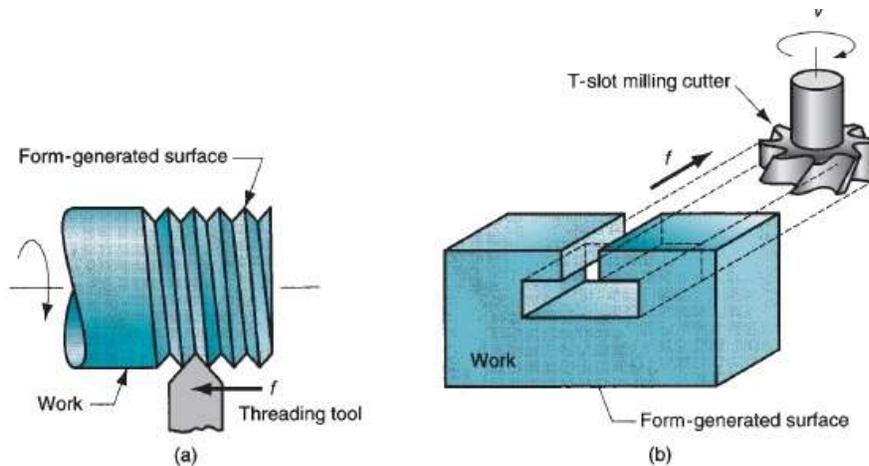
Combination of forming and generating to create shape: (a) thread cutting on a lathe, and (b) slot milling.
